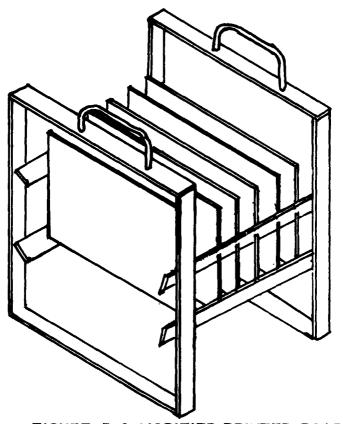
MODIFIED PRINTED BOARD RACK FOR DRAGOUT CONTROL
